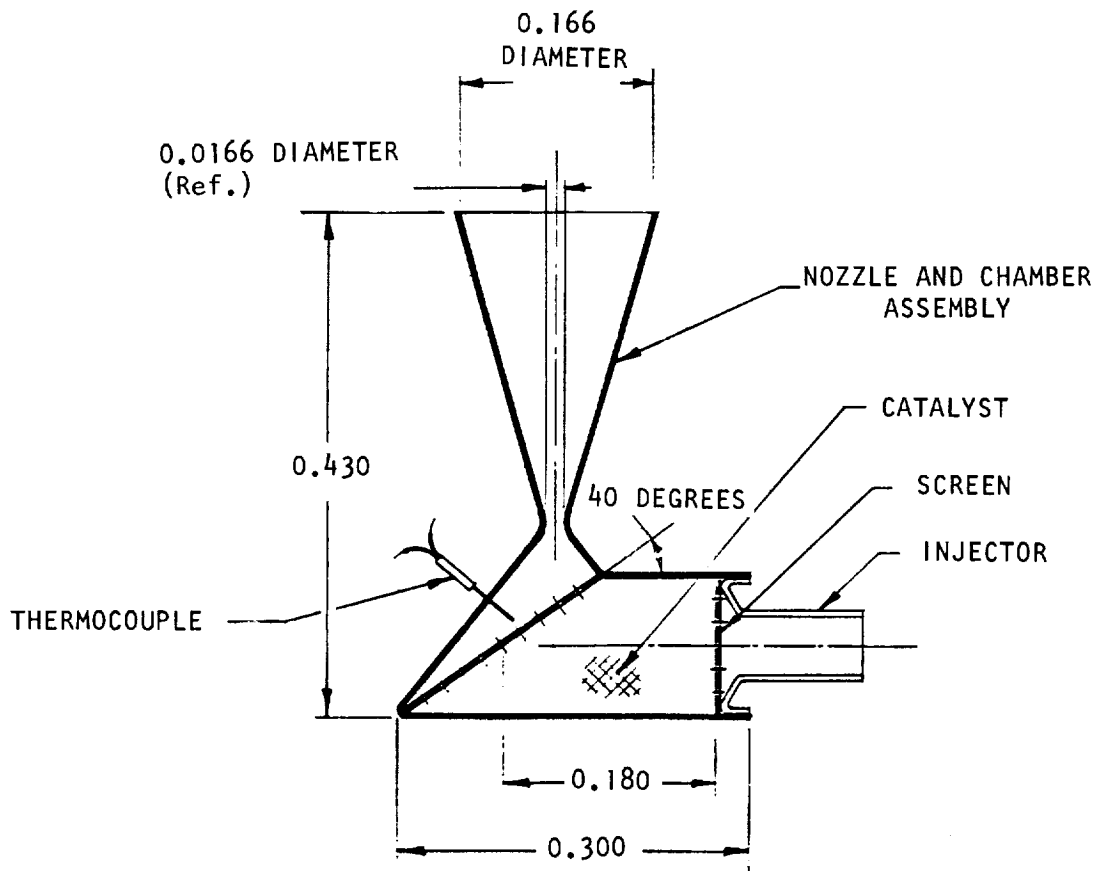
Thrust Chamber Assembly (0.01-Pound Thrust)
